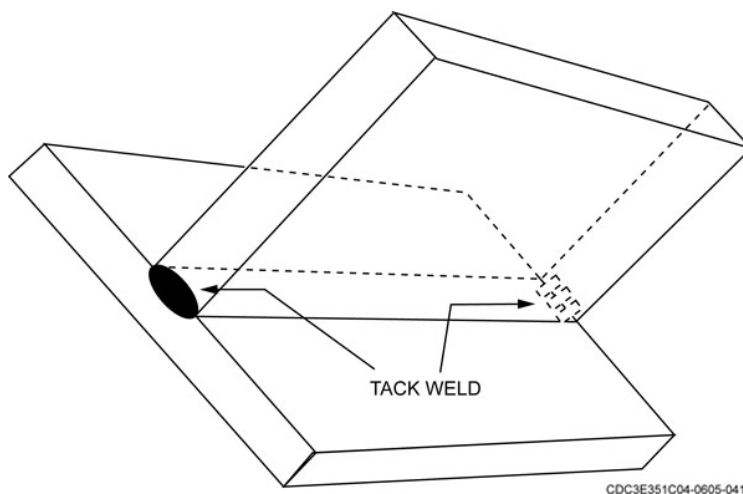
Tee joint tack welds (horizontal position).
